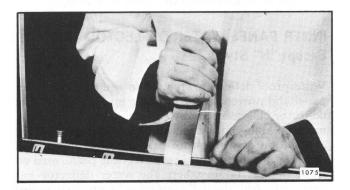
Clip Retained Belt Sealing Strip Removal
